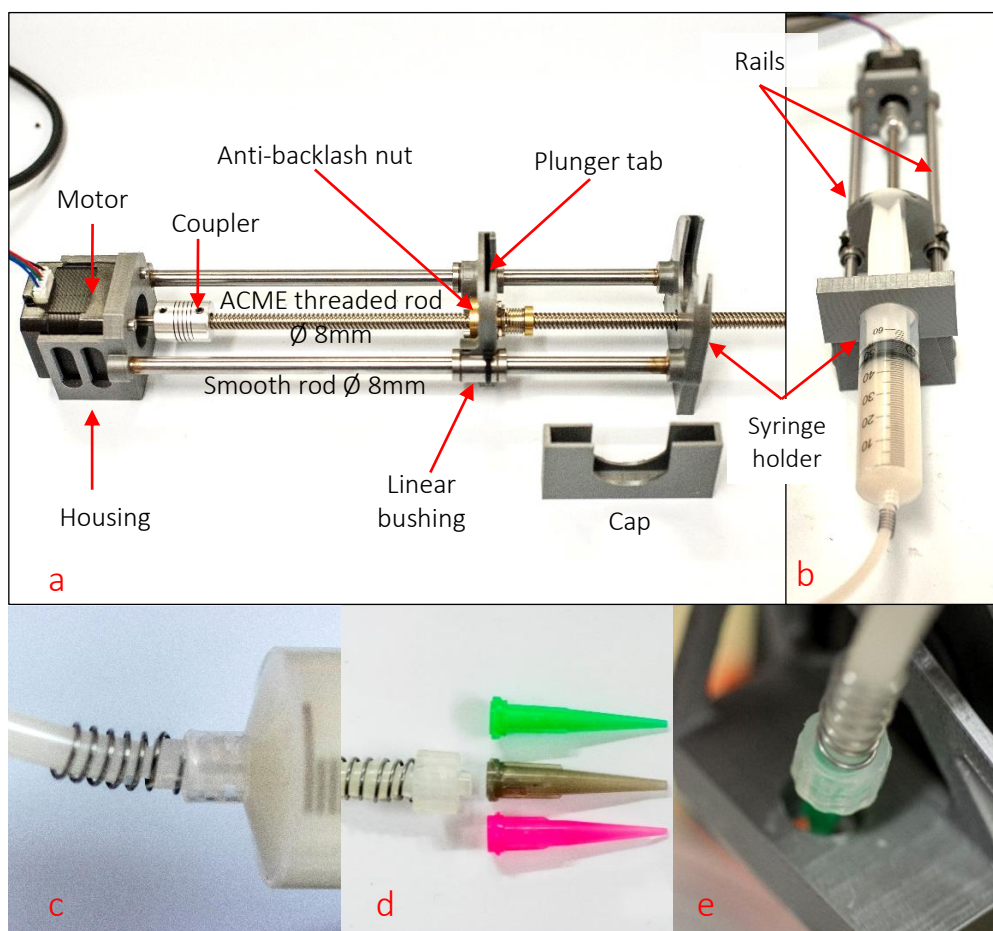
Paste extruder. (a) Key components, (b) loaded with syringe containing hydrogel composite, (c) female luer barb lock and PTFE tubing assembly, (d) male luer nozzle assembly and a selection of nozzle sizes, and (e) Push-fit nozzle assembly into the housing attached to the X carriage.
